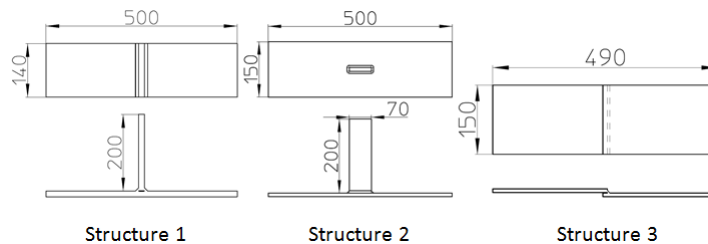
Geometrical dimensions of structures 1,2,3, in millimetres
